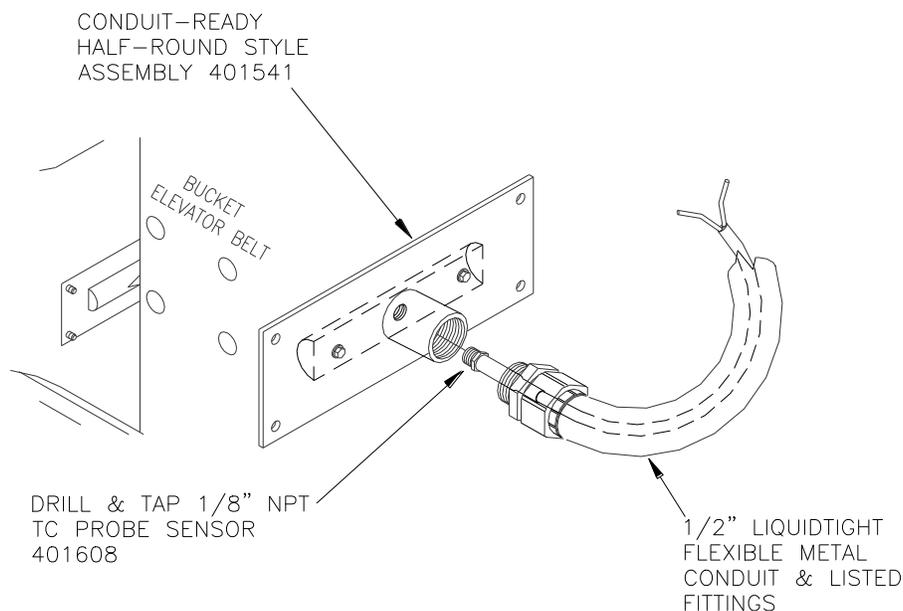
Rub Block & Drill & Tap 1/8-Inch NPT Probe Sensor
